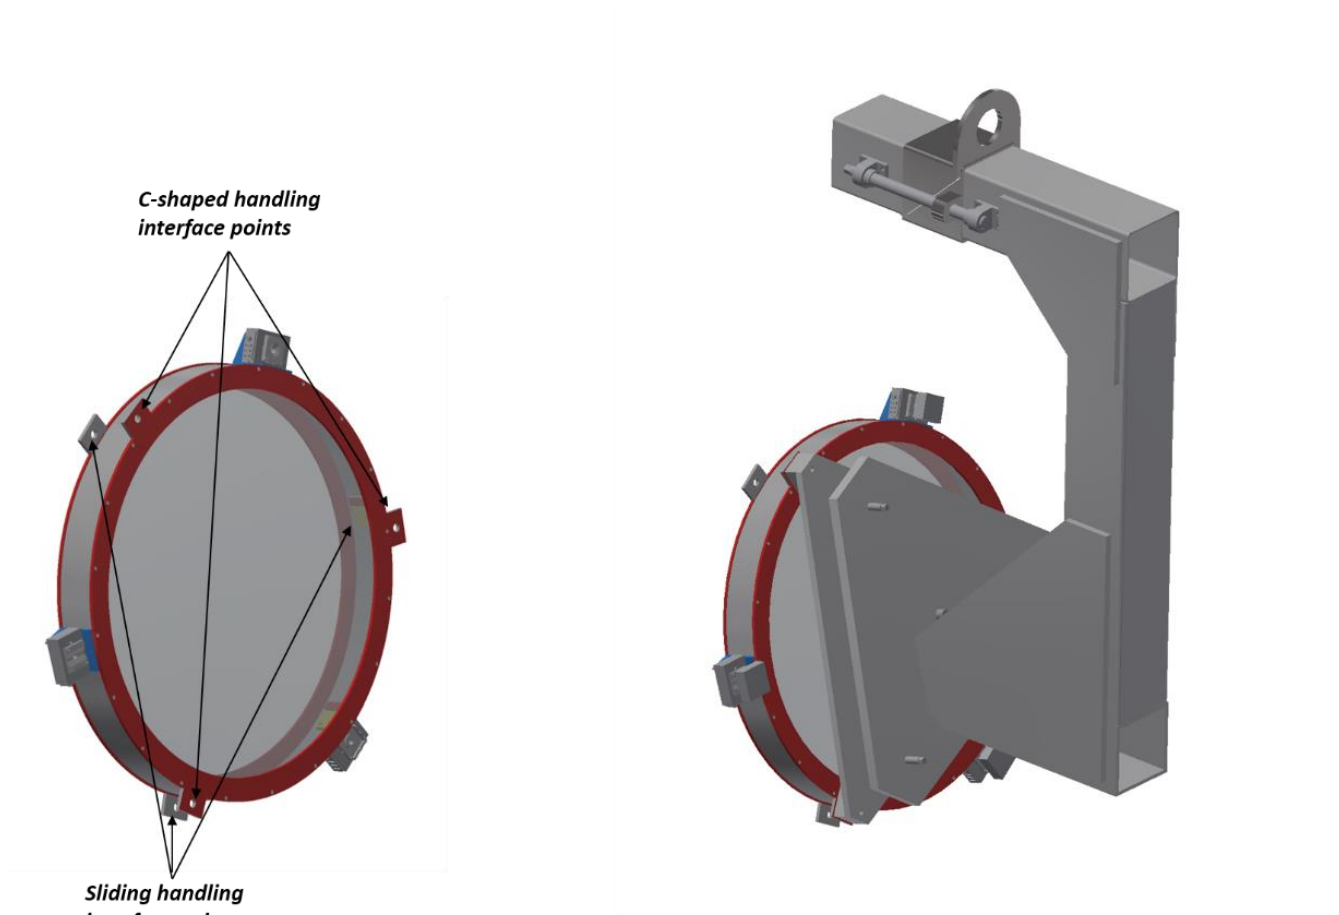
the C-shaped handling used to position the dichroic on the rail system
